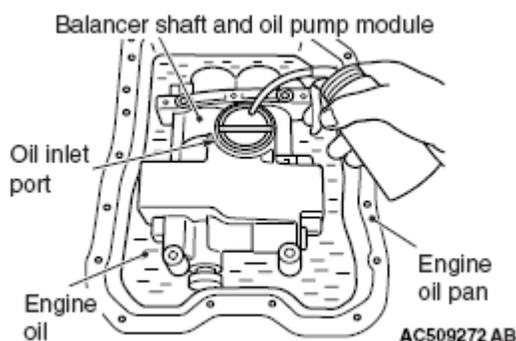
Identifying Engine Oil, Oil Inlet Port And Engine Oil Pan
